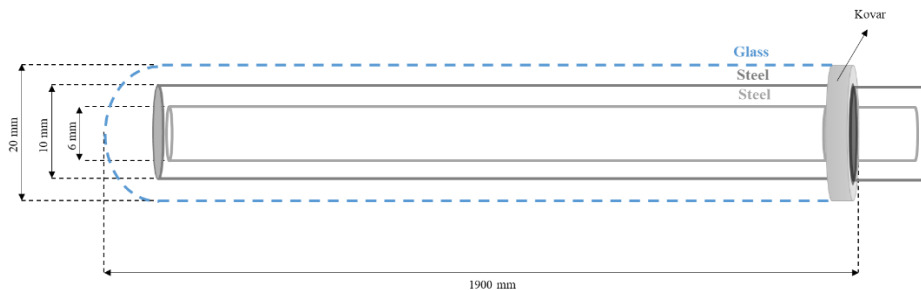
The scheme of the One-End receiver tube for m-PTC.
